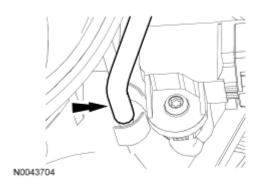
Locating AIR Valve Vacuum Supply Tube Courtesy of FORD MOTOR CO.
